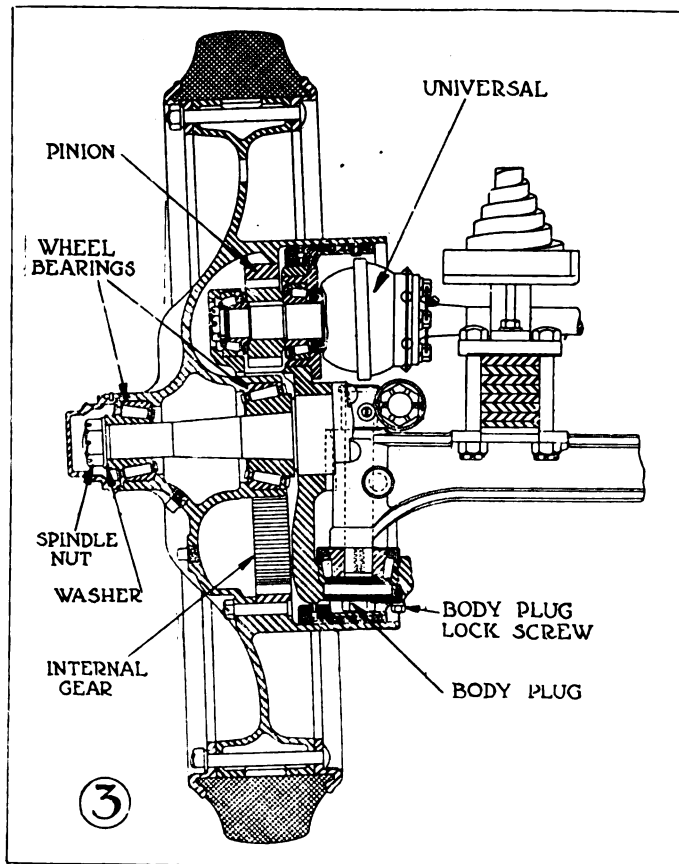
The wheel and axle assembly, showing details of the mechanism for steering and driving the truck. All four wheels are alike in this respect.
